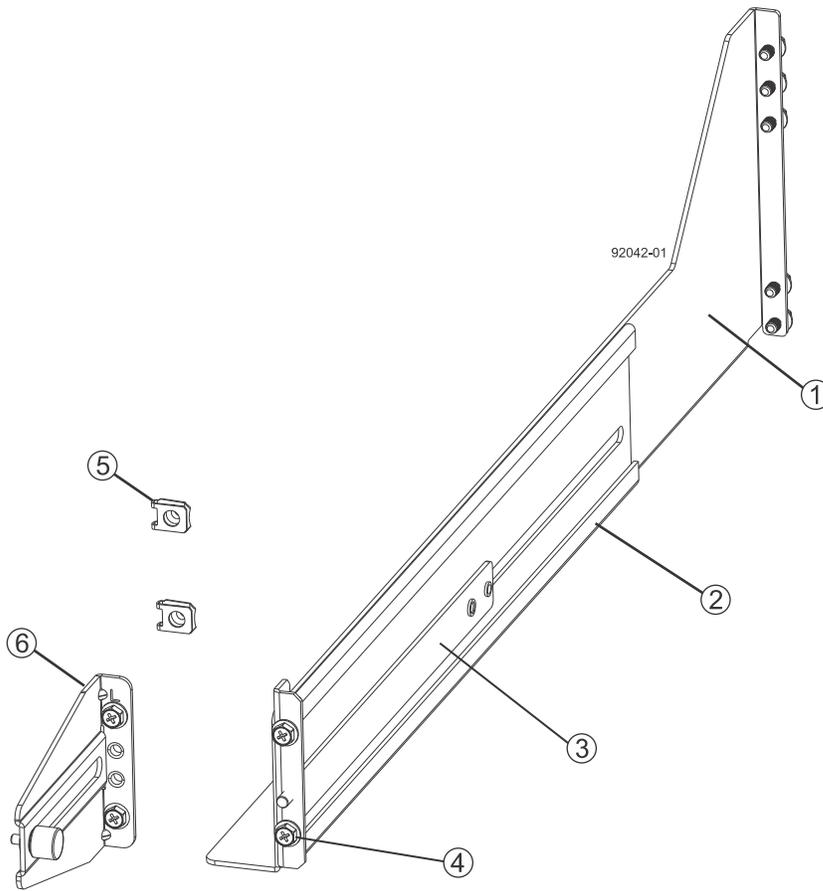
Attaching the Long, Fixed-Size Mounting Rails to the Cabinet
